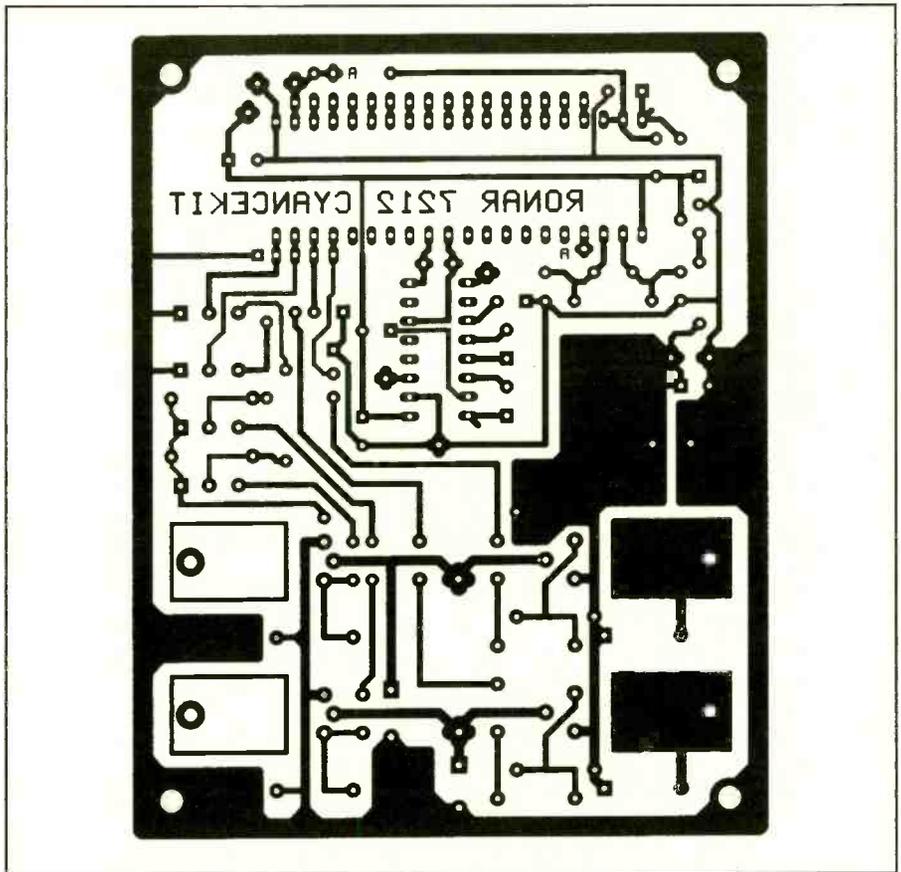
Use this actual-size artwork for fabricating your own printed-circuit board on which to wire the motor-drive circuit.
